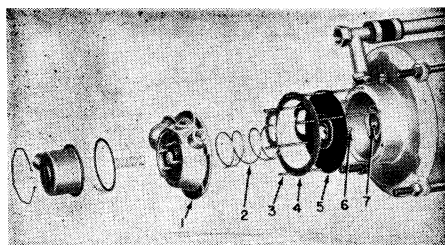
Assembly of rear cylinder shell, end plate and cylinder studs
